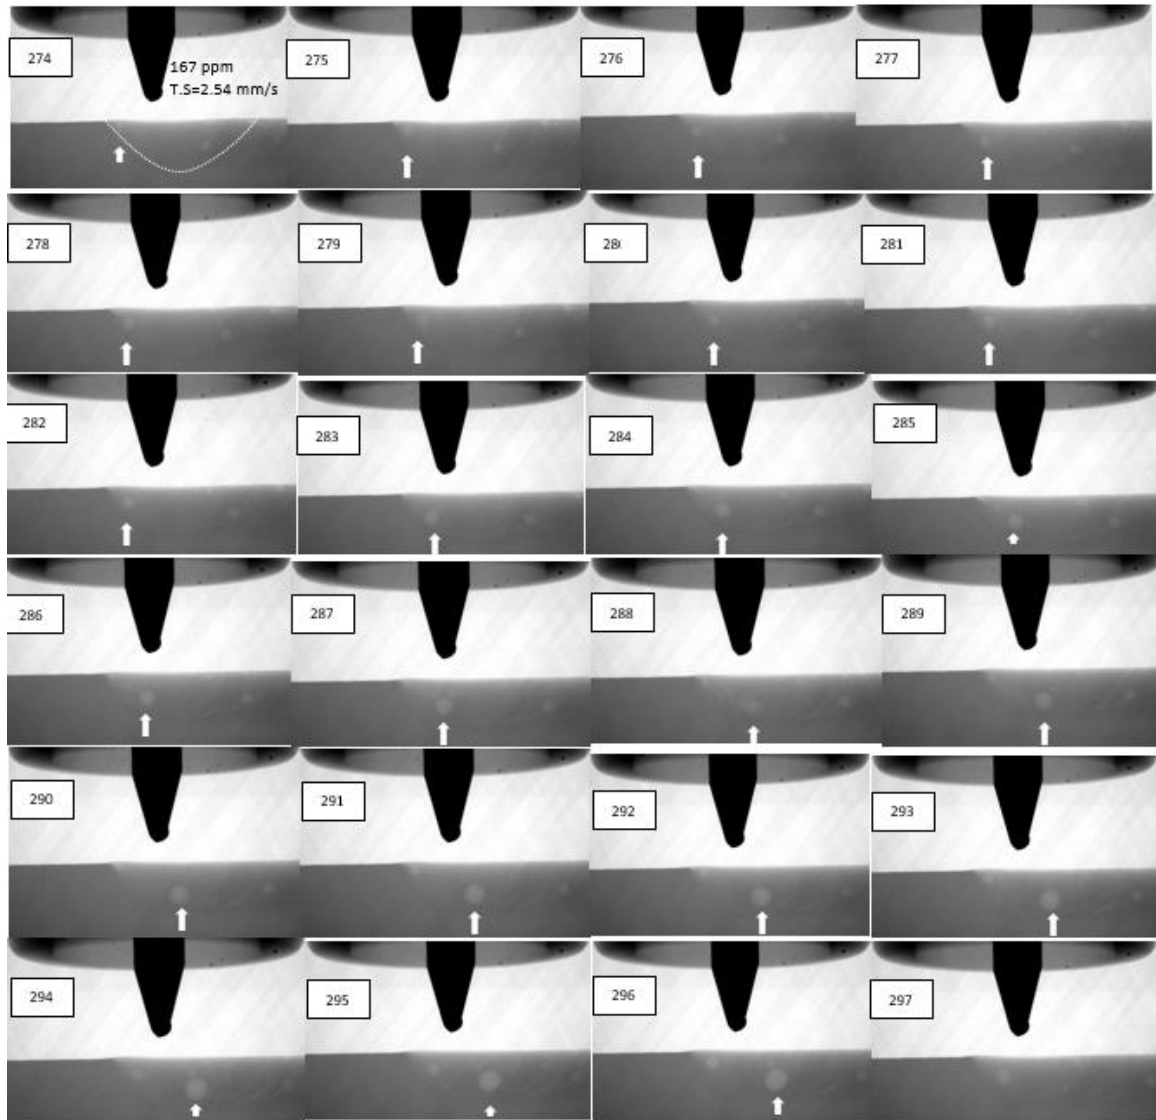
Alloy 6061 welded using 167 ppm of shielding gas hydrogen at 2.54 mm/s.
